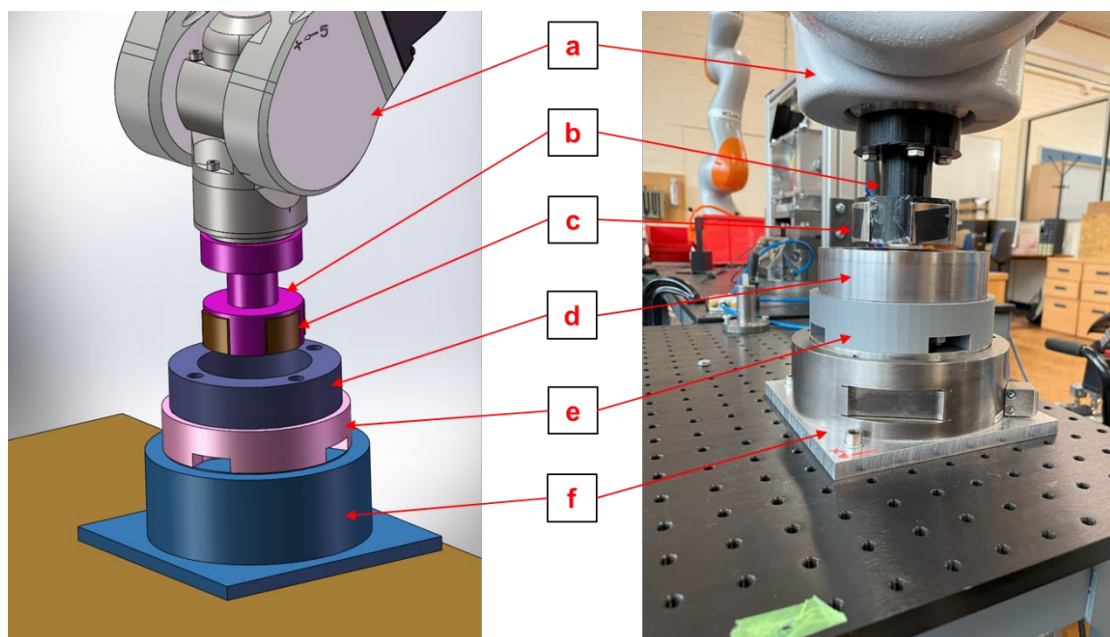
Experimental setup for the cylindrical rotor-stator problem: (a) Staubli TX90L Touch (robot), (b) magnet holder, (c) magnets, (d) steel hub, (d) holder of the steel hub and (f) ATI
